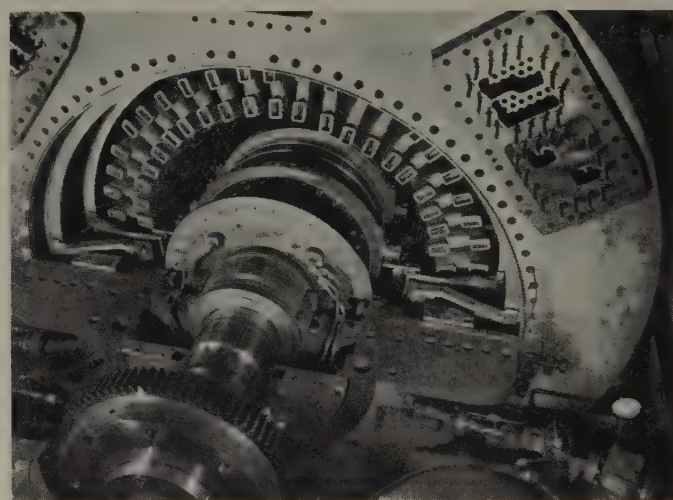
End view of inner-cooled stator windings and bearing bracket
